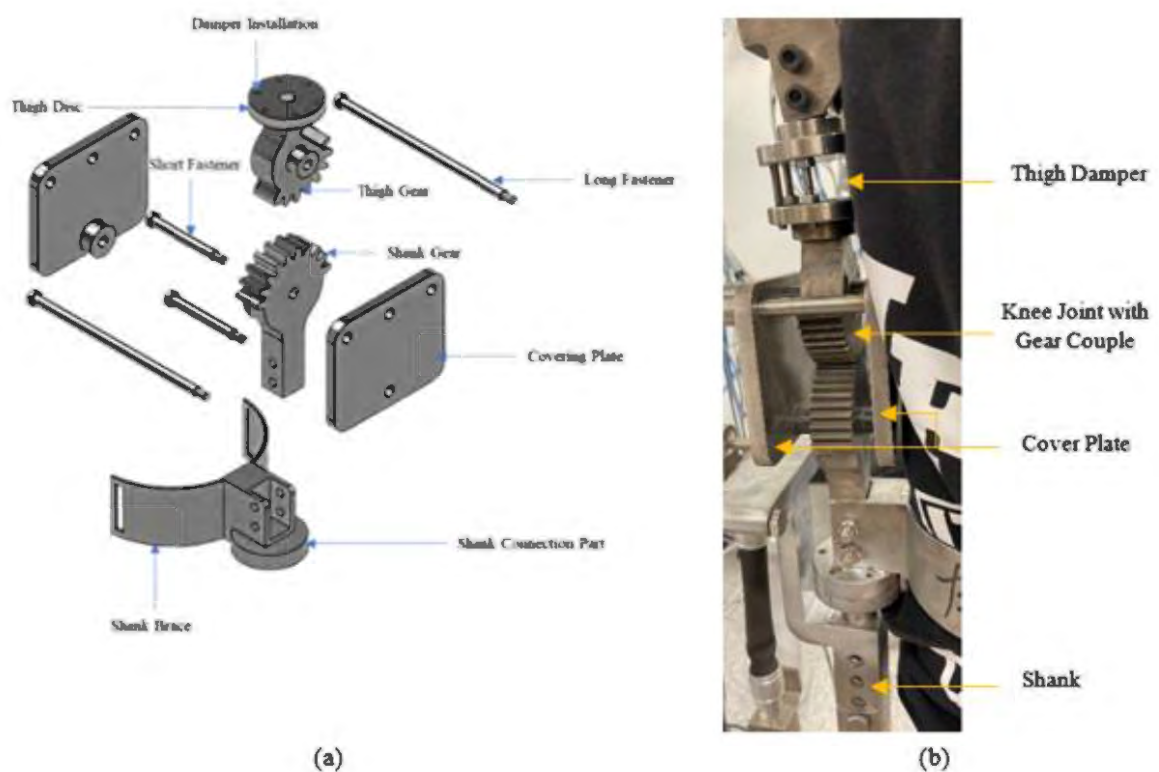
(a) CAD design of robot Knee Joint with Gear Couple Mechanism. (b) Prototype of knee joint with Gear Couple Mechanism.
